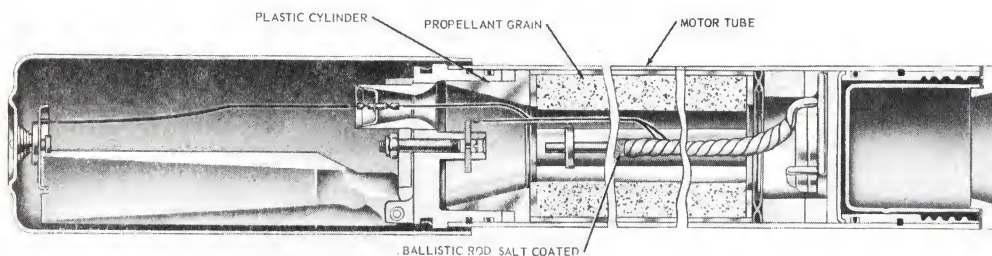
2.75-Inch Rocket Motor Mk 4 Mod 0, Sectional View.
